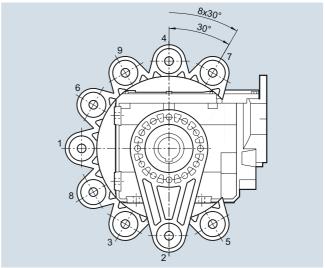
/9 Bevel gearboxes BAD., sizes 39 and 49
